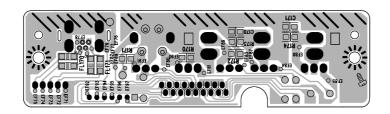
EU55 Front Jack PC Broad (Bottom side)
